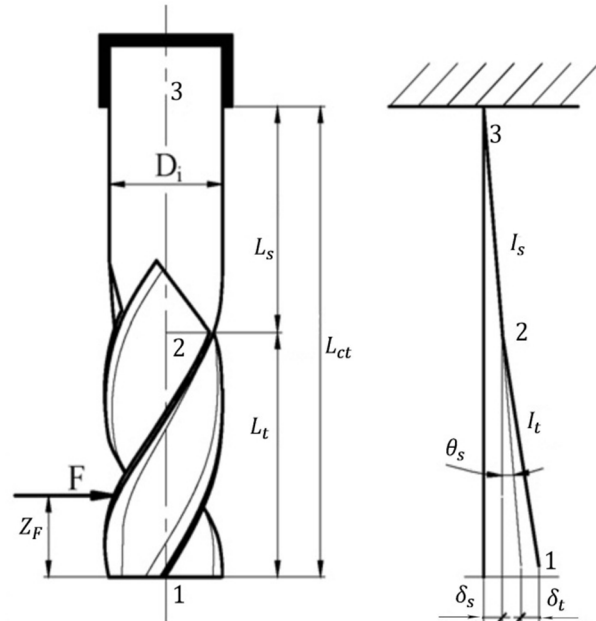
Cutting tool as a two-step cylindrical cantilever beam [15]
